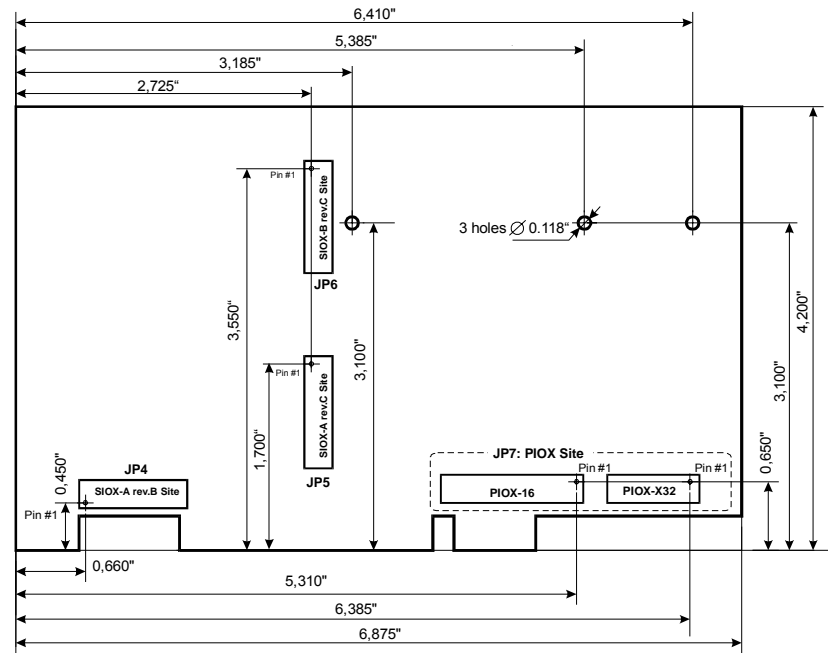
Physical dimensions for *TORNADO-P6x* DSP system boards.
